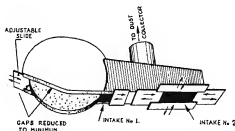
Development Stage I of experimental attachment for dust control on swing frame grinder. Note the sliding covers on the underside of the attachment.
